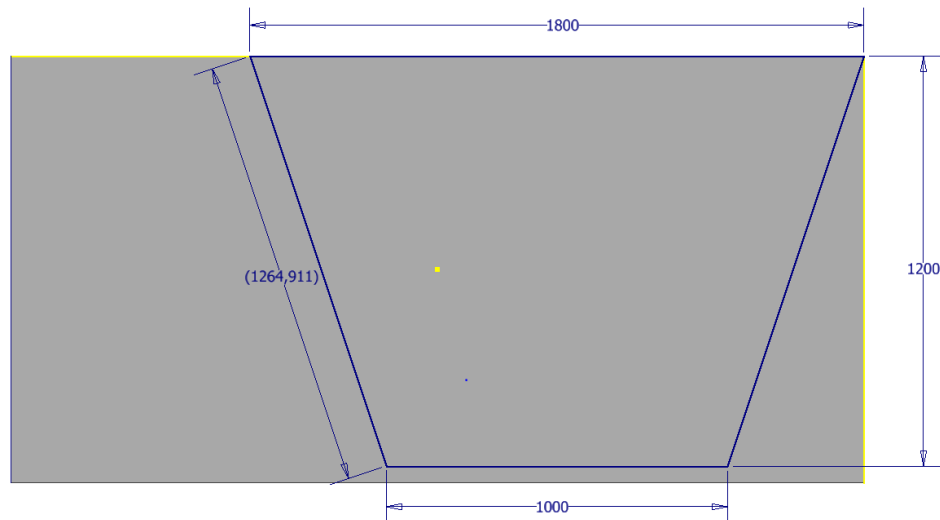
Demonstration of the wall sections cut from a single aluminium sheet.
